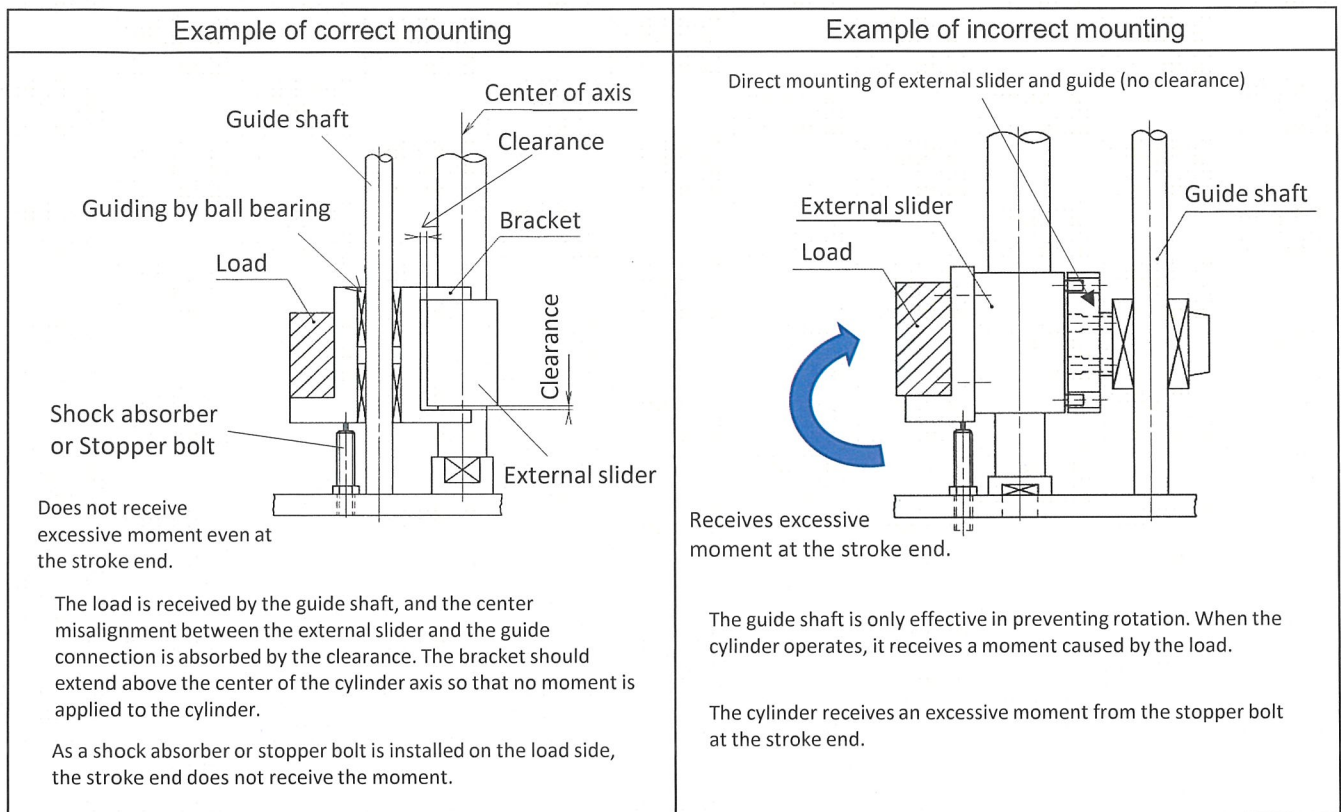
Installation example 3 Misalignment between cylinder and load cannot be absorbed
